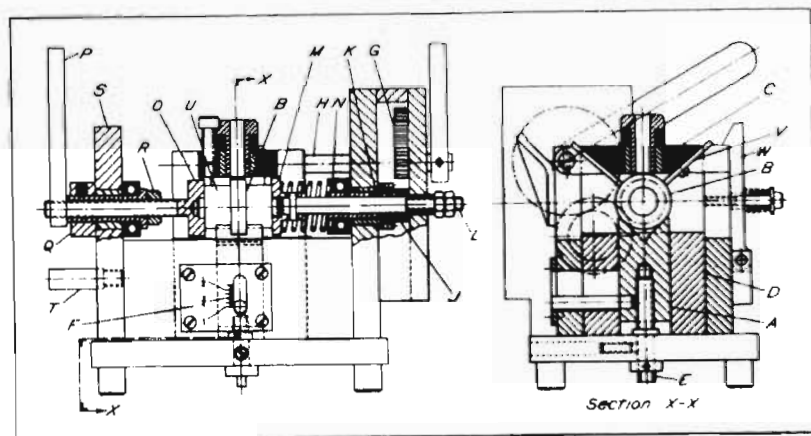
Drill jig with mechanism for clamping and indexing a variety of cylindrical parts. Clamping action is concurrent with lowering of hinged jig plate.
